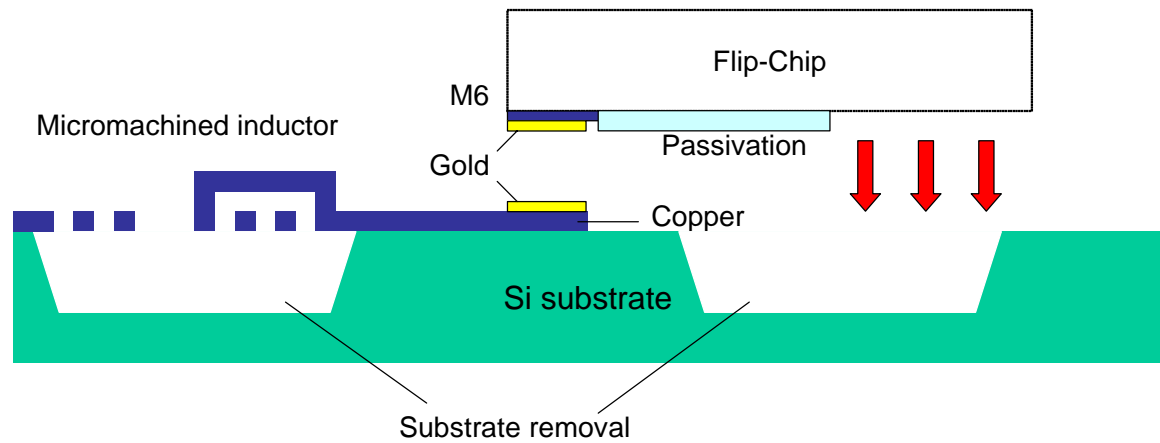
The joining process of Au-Au TC bonding between the micro-machined carrier and UWB tunable LNA chip.
